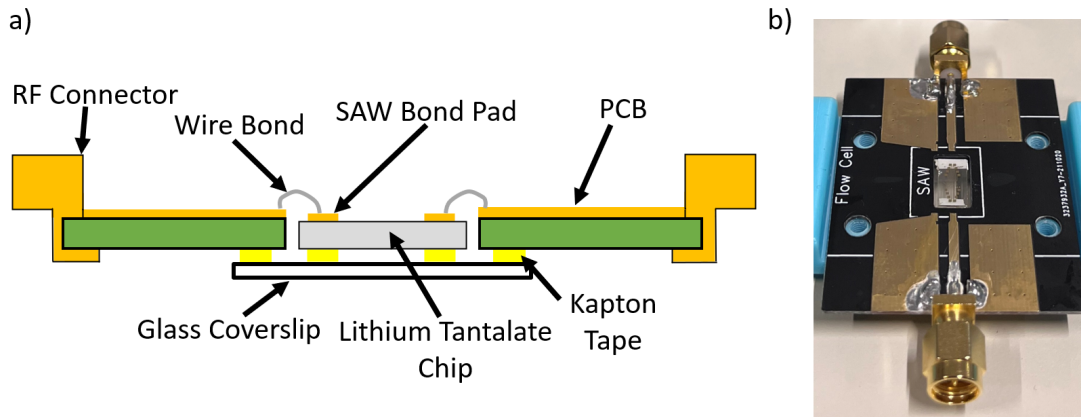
a) Stacked configuration of PCB with SAW device b) Realized PCB stack.
